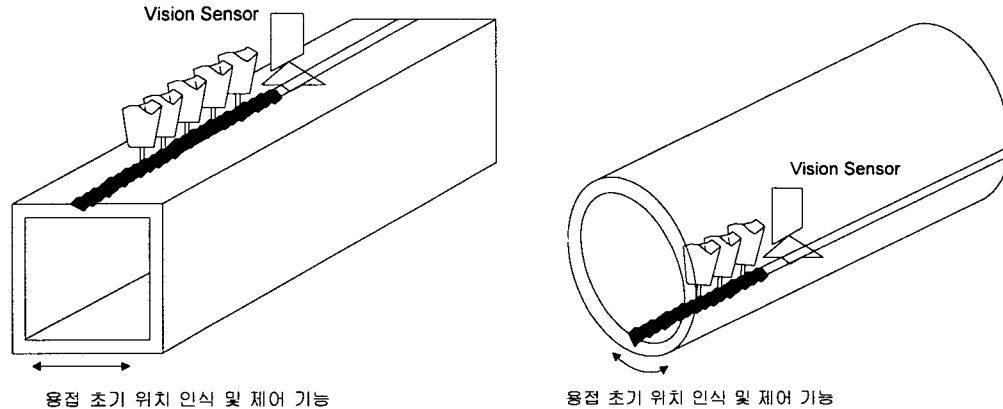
Schematic diagram for automatic pipe welding system developed
